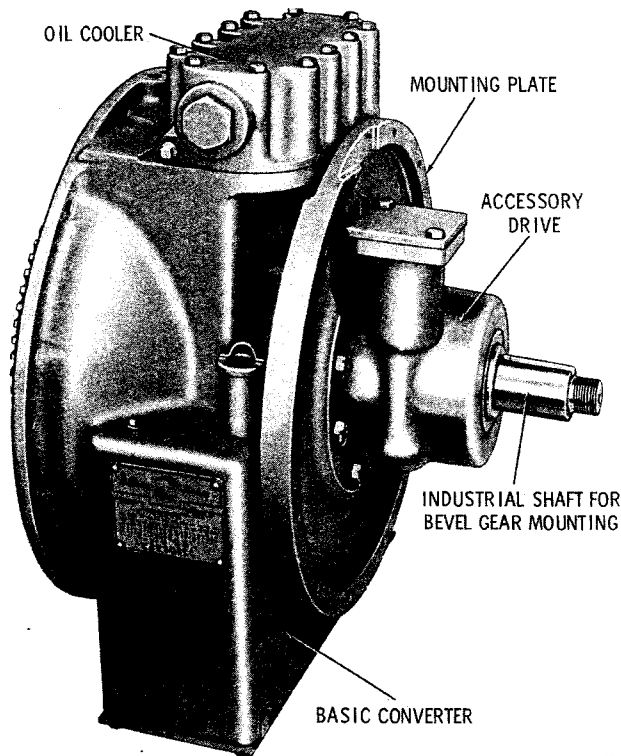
Model TCA 248 converter with oil cooler, accessory drive, industrial shaft, mounting plate options—left-rear view
